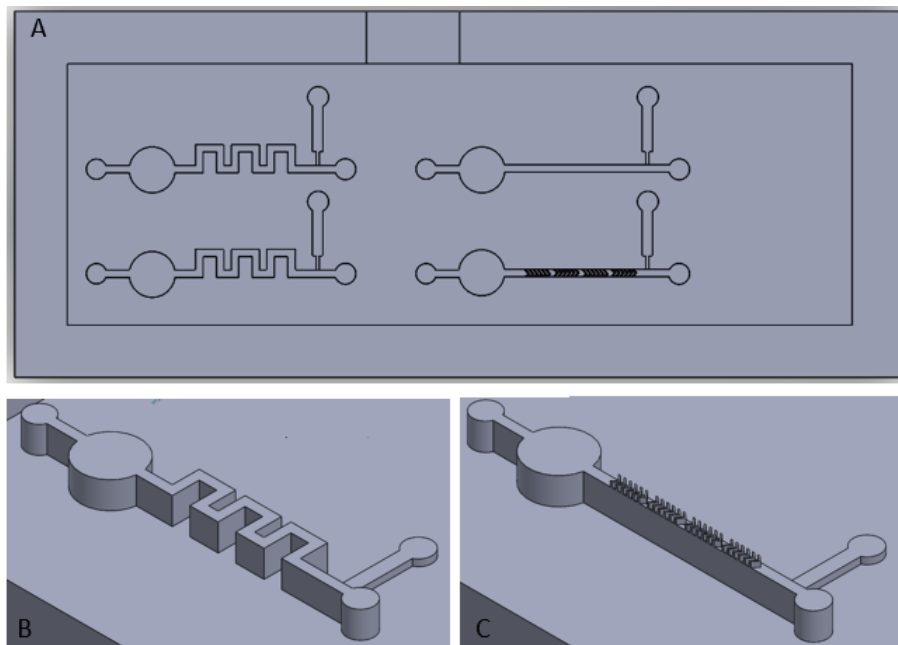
A) 3D view in SolidWorks of master mould B) Zoom in on serpentine mixer C) Zoom-in on staggered herringbone mixer.
